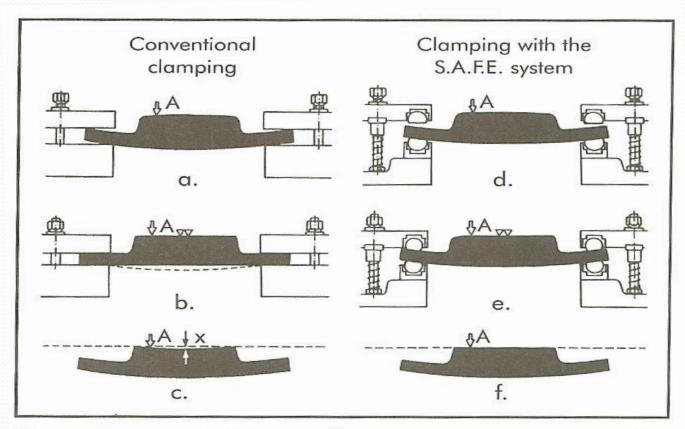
Modular tooling system with self-adjusting fixturing elements. (Courtesy Enerpac Group, Applied Power, Inc.)
